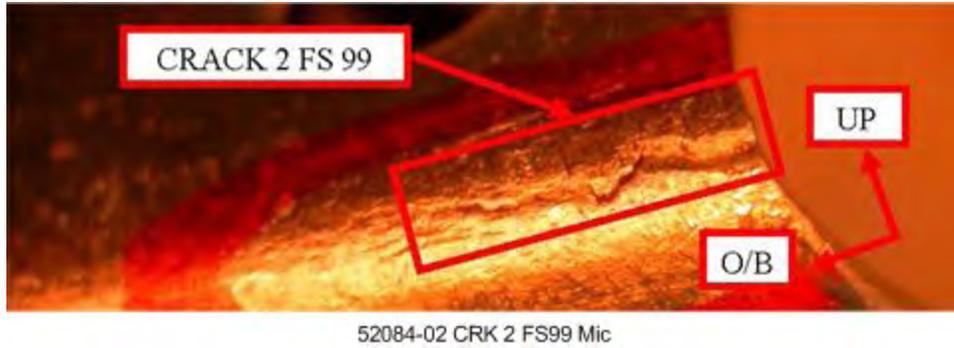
Microscopic View of Crack 2 on the Bulkhead Assembly FS 99
